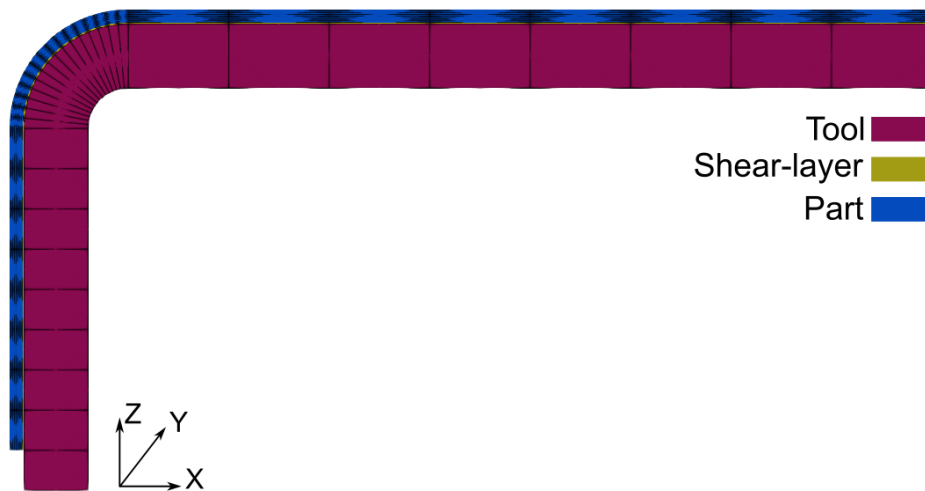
C-shaped model composed by tool, shear-layer and composite part.
